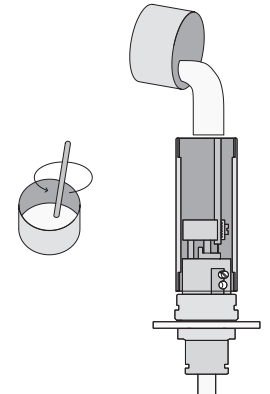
+9 for Step 7: Mixing and pouring of the casting resin
